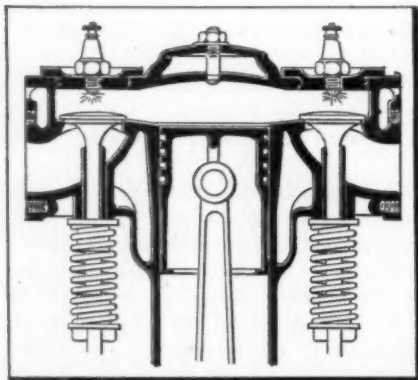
Section of the cylinder of the motor on which the tests were carried out, showing position of spark plugs.
